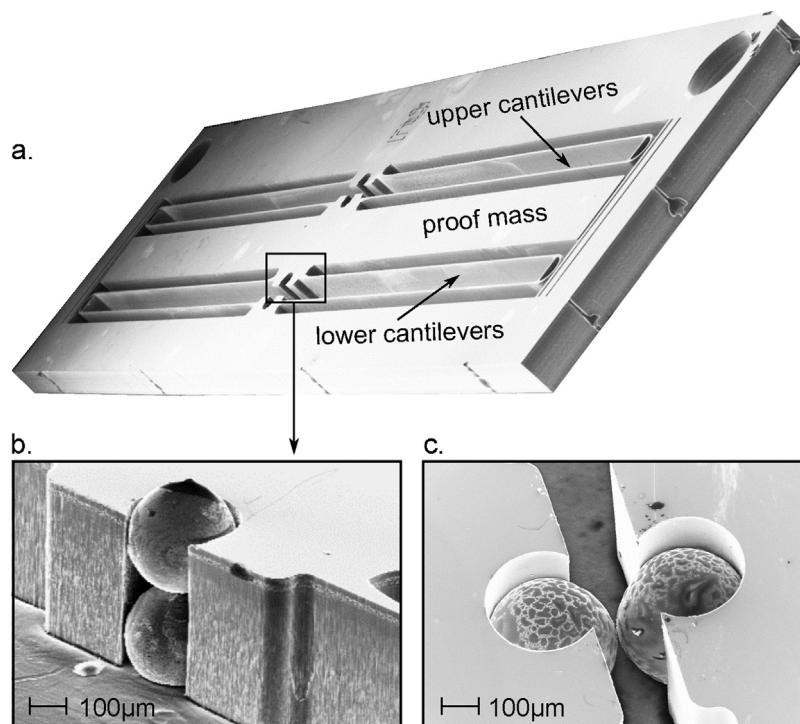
(a) Model suspension system, (b) solder balls before reflow, and (c) solder bumper after reflow.
